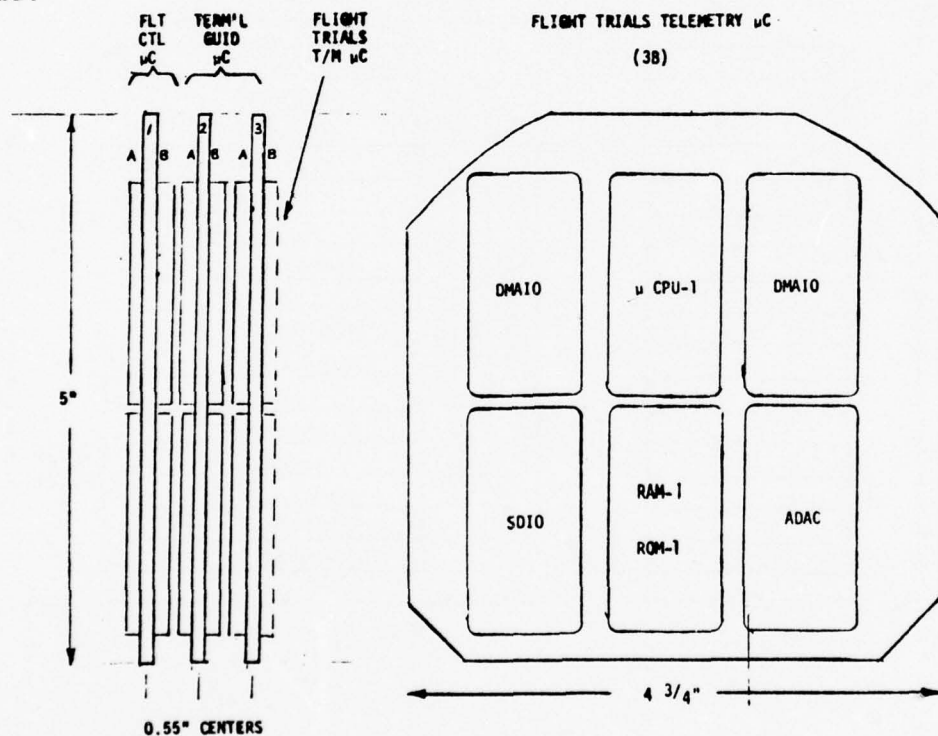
VLSI/PCB Missile Form-Factored Packaging
